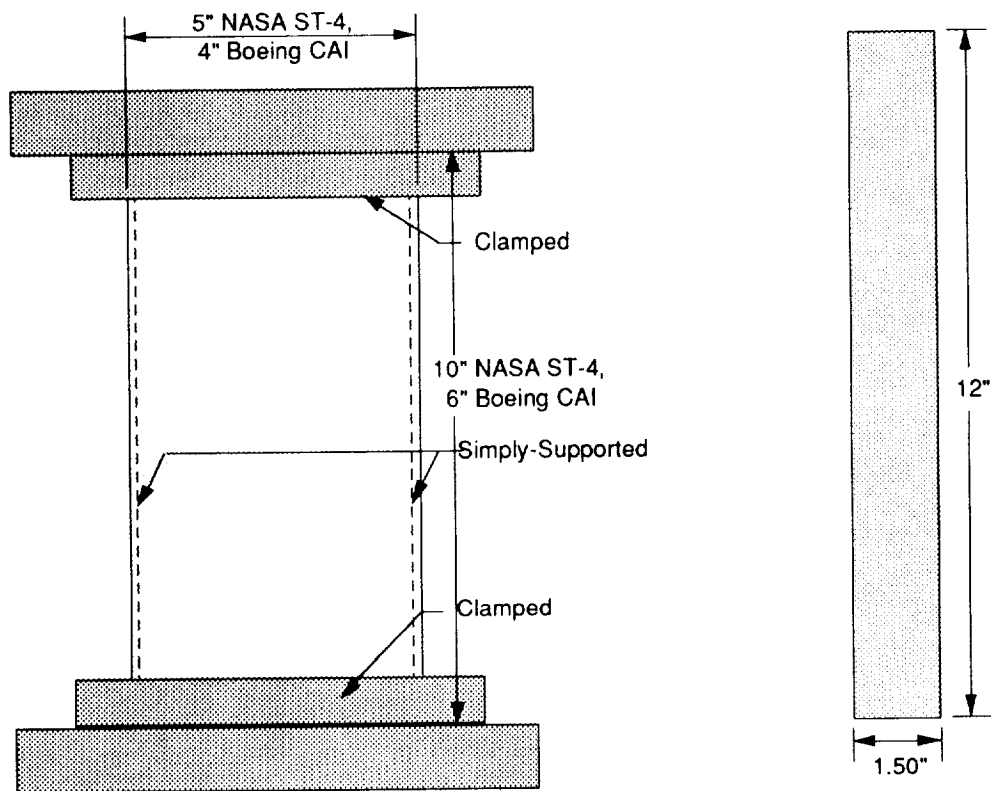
c NASA ST-4 or Boeing CAI Specimen and Boeing OHC or Zabora Fixture Specimen.
